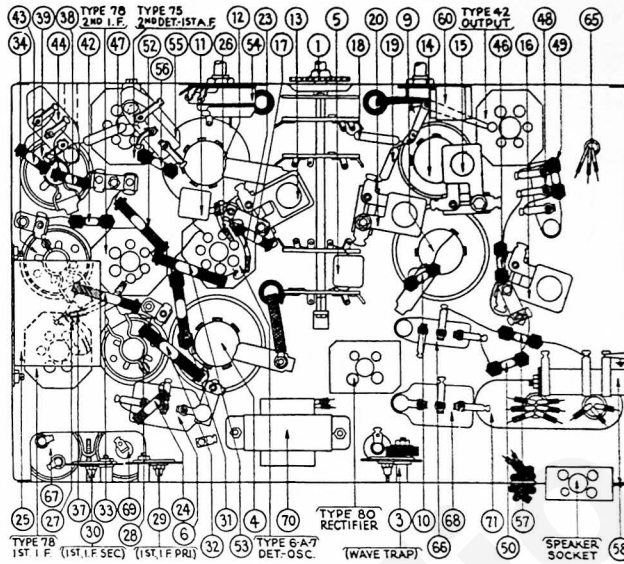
Bottom View of Chassis, Showing Parts, and Position of Compensating Condensers Located, —and Reached,— from Below Chassis
